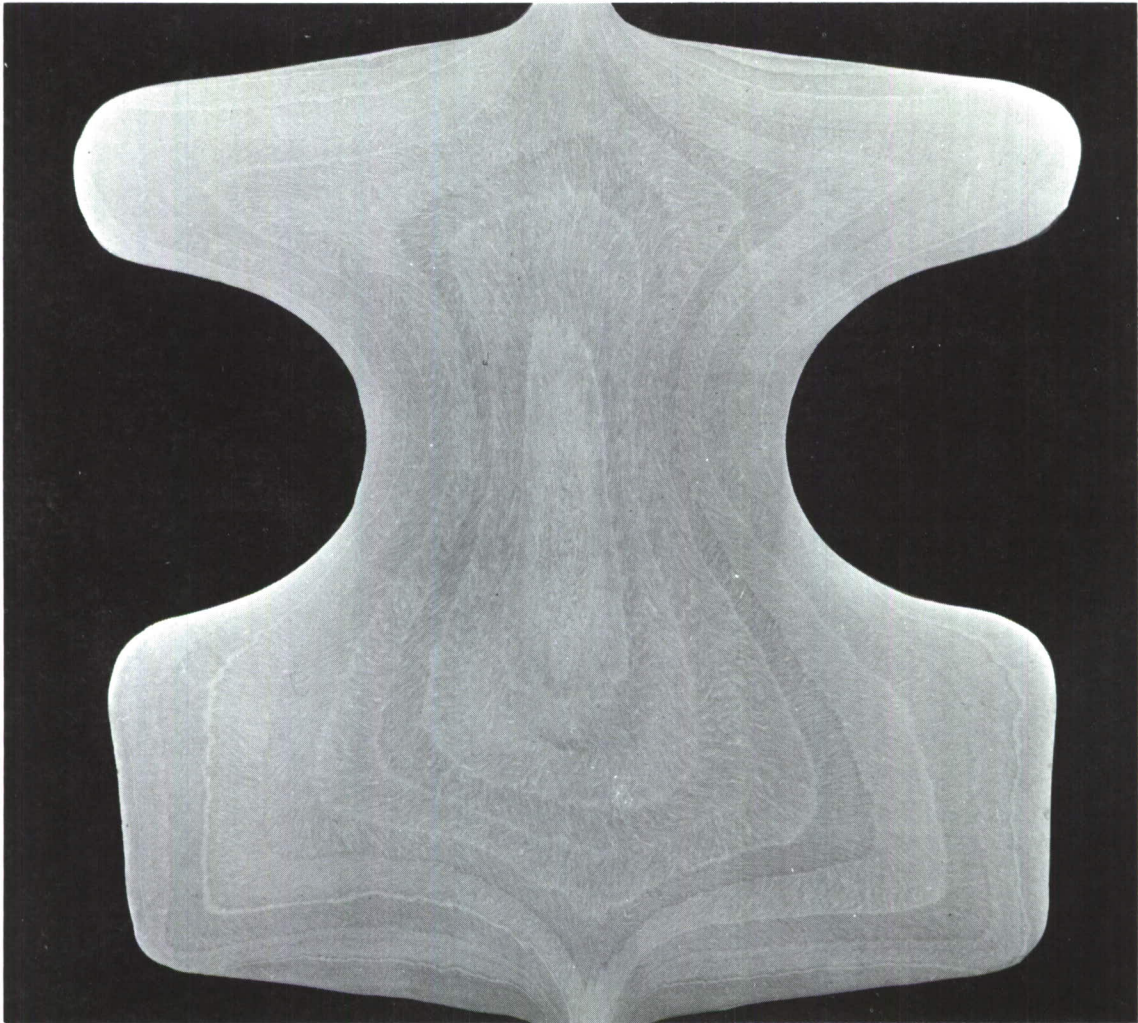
IMI 679 Transverse Section Through Forging Center Section
